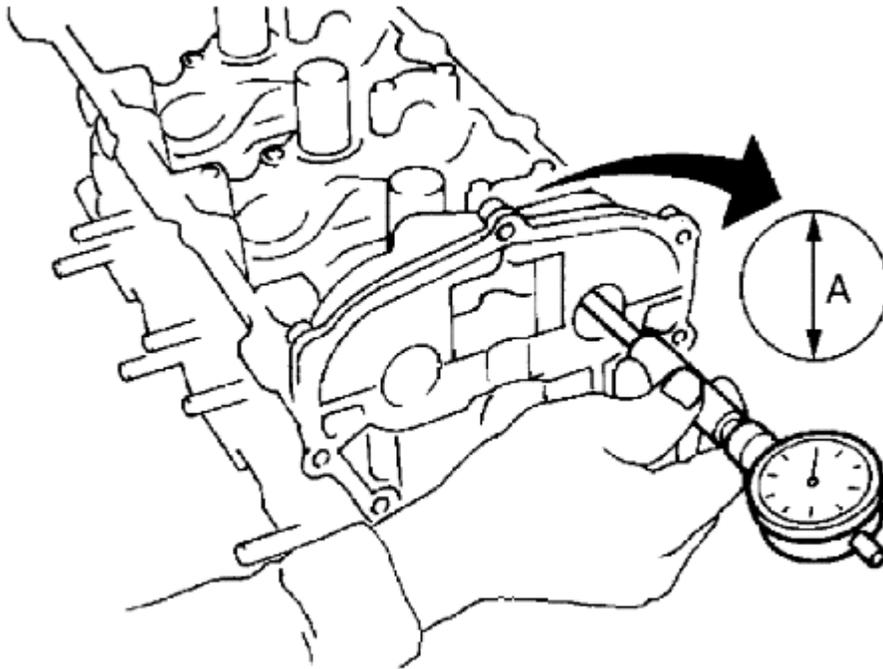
Measuring Inner Diameter "A" Of Camshaft Bracket Using Bore Gauge
